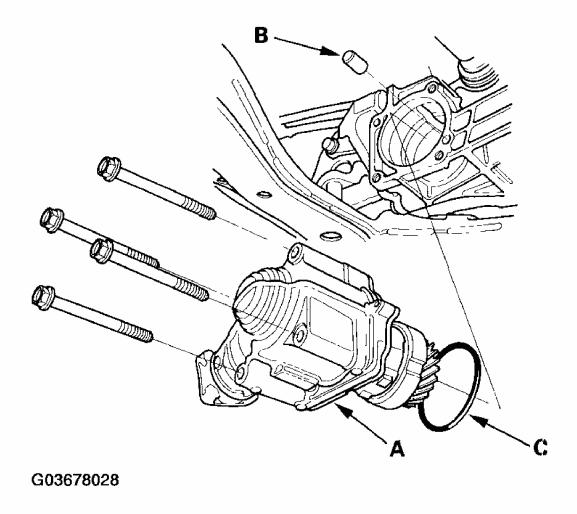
Removing Transfer Assembly, Dowel Pin, And O-Ring Courtesy of AMERICAN HONDA MOTOR CO., INC.
